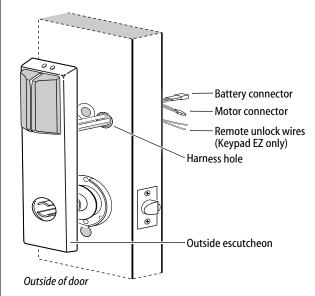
Feeding the wire harness connectors through the harness hole (B.A.S.I.S. Lock shown)
